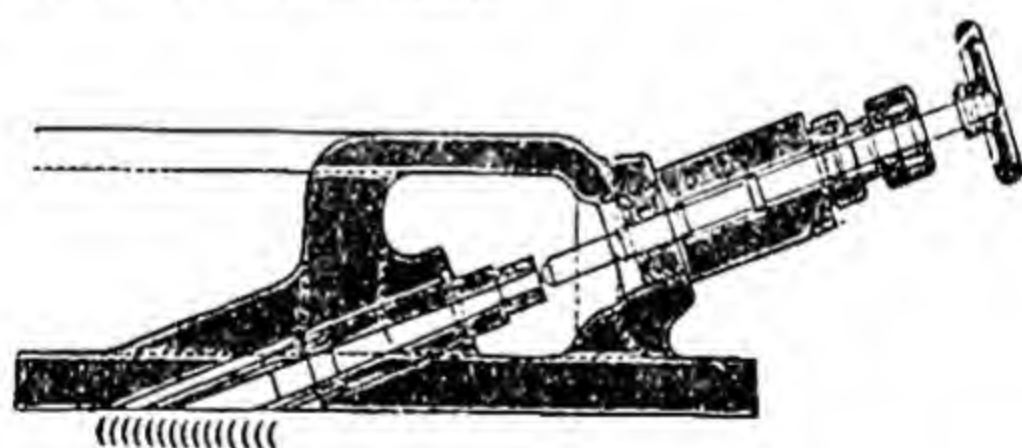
Nozzle and shut-off valve of the de Laval steam turbine.
